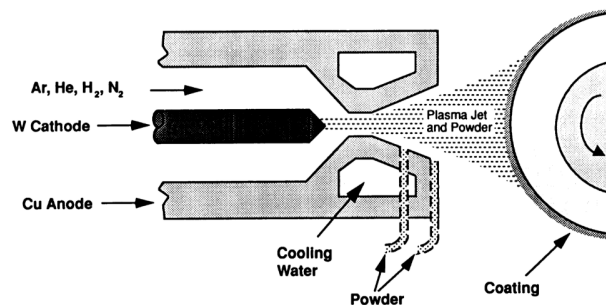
Plasma spray process. Courtesy of Praxair Surface Technologies, Inc. [74].
